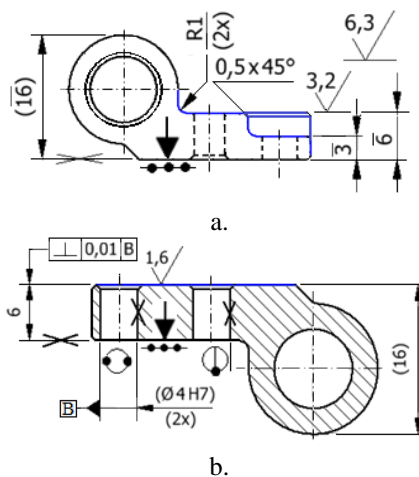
Sketches of two operations including machining by milling – a, grinding – b, with magnetic fixturing of the part
